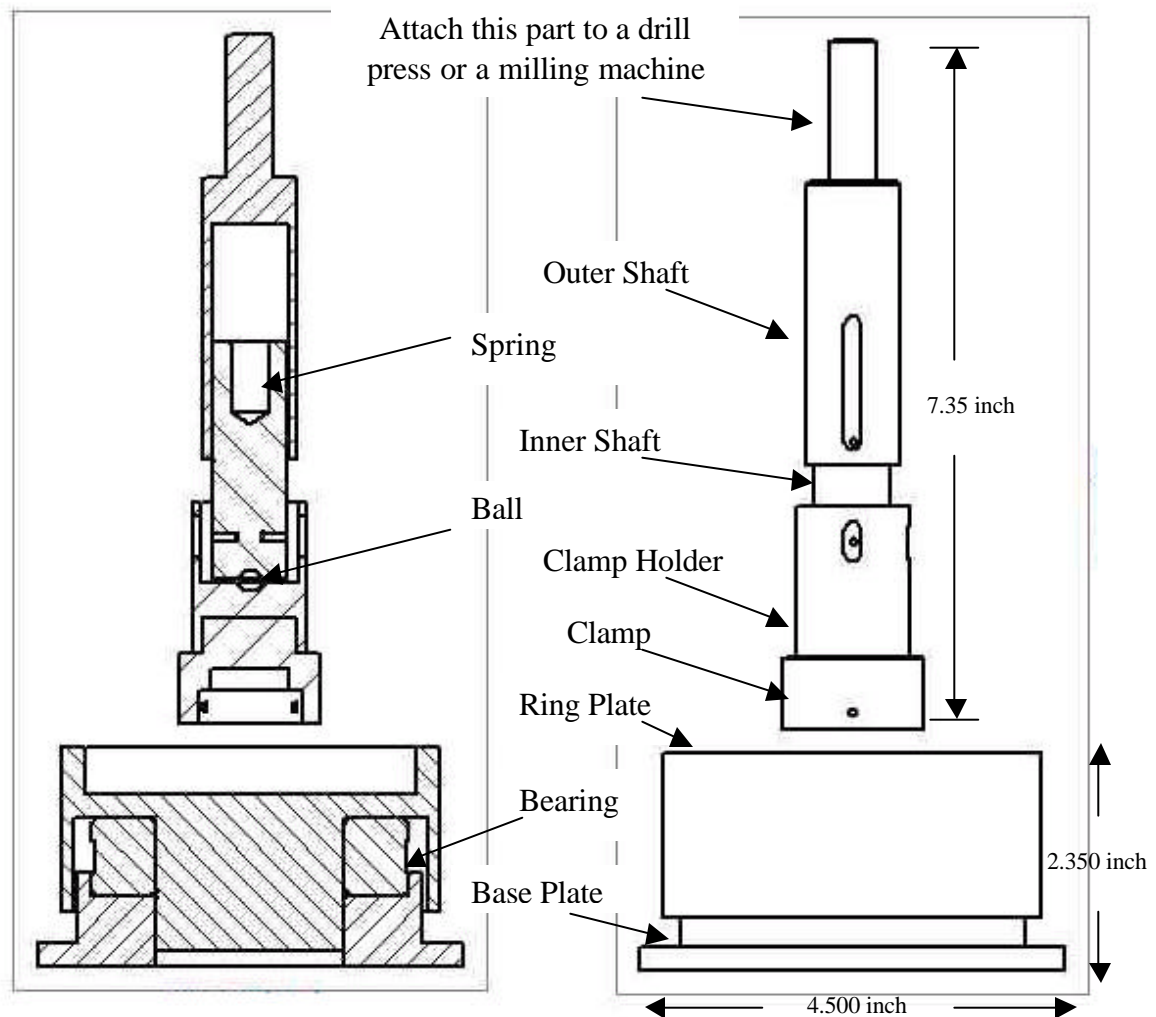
Prototype Mechanical Lapping Tool (sponsored by United State Products Co.)
